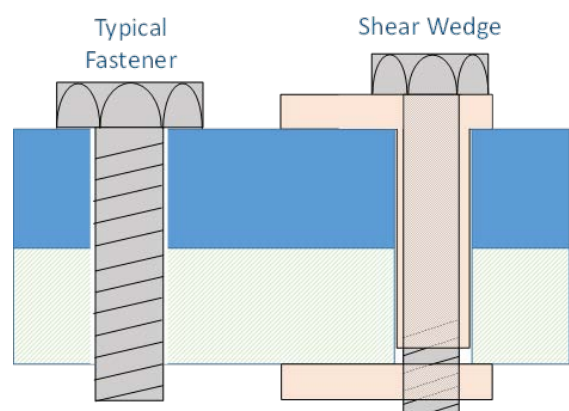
Fastener configurations for TSS-1 (a) nominal fastener in joint assembly, (b) modified joint assembly
